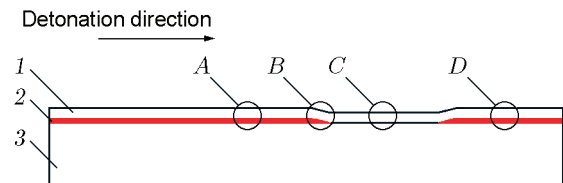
Composite sample obtained by explosive welding: hardened steel plates (1 and 3) and copper interlayer (2); A, B, C, and D are the areas of investigation of the bonding zone.
